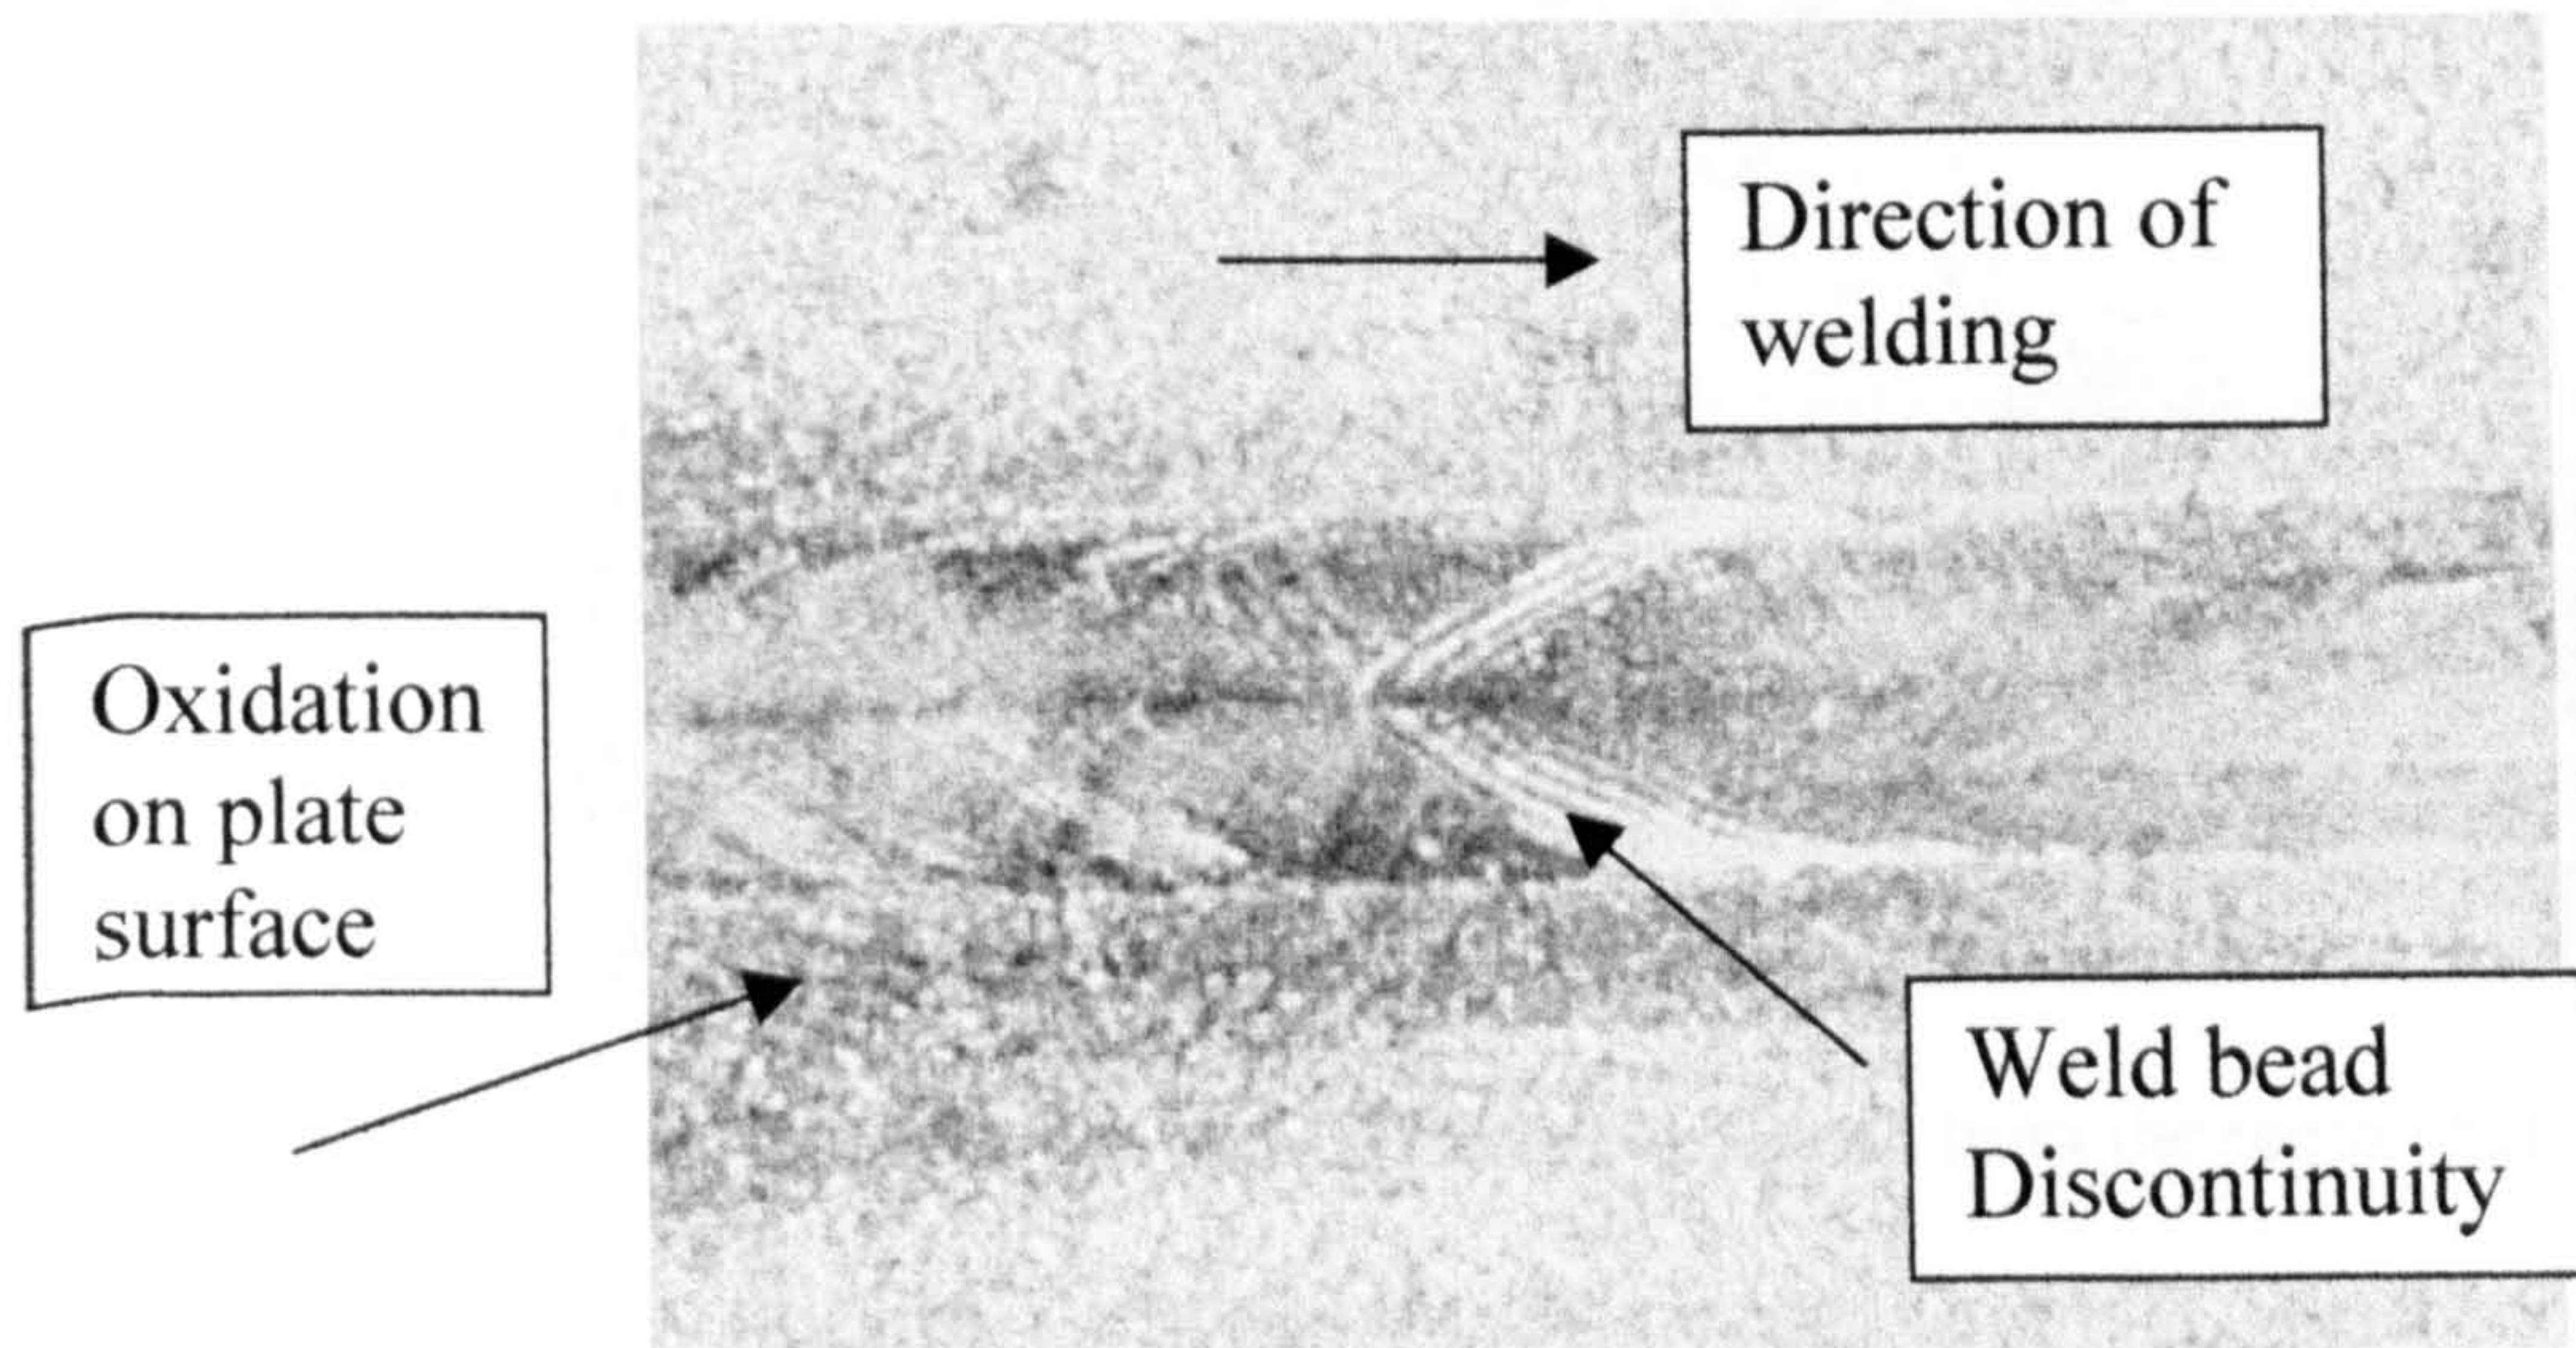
Discontinuity or transition in the surface of the weld after 2.5 seconds of welding.
